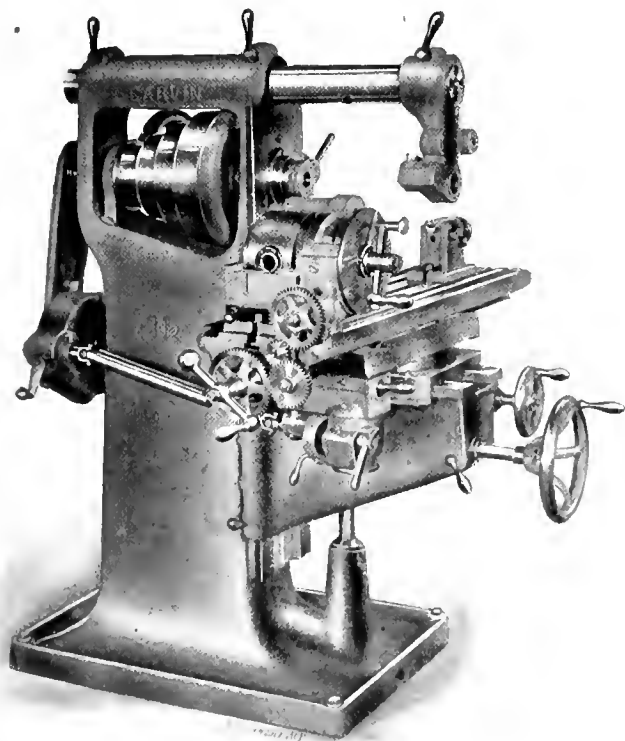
Garvin No. 11 2 Geared Feed Milling Machine
